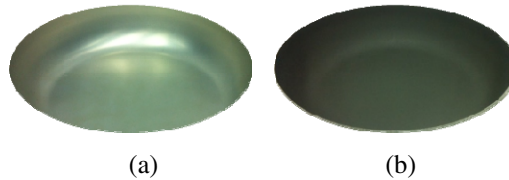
Formed aluminum plate: (a) before Teflon coating; (b) after Teflon coating
